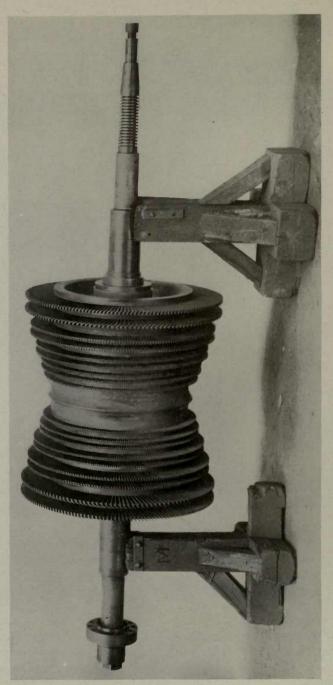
Spindle of Low Pressure Turbine, showing the blading
